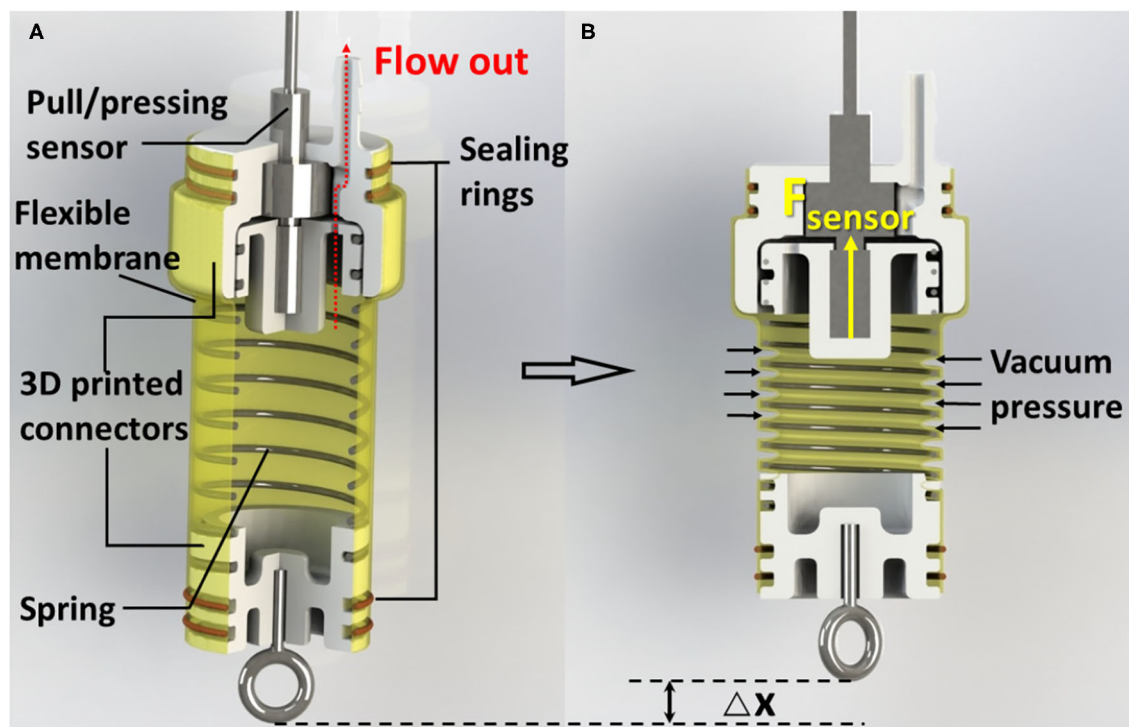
| (A) Cutaway view of the Self-sensing Pneumatic Compressing Artificial Muscle (SPCAM). A typical SPCAM mainly consists of a compressing spring, 3D-printed parts, a flexible membrane, seals, and a pull/pressing sensor. (B) SPCAM under working state. The vacuum pressure pushes the membrane deform inward to make the actuator contract.
